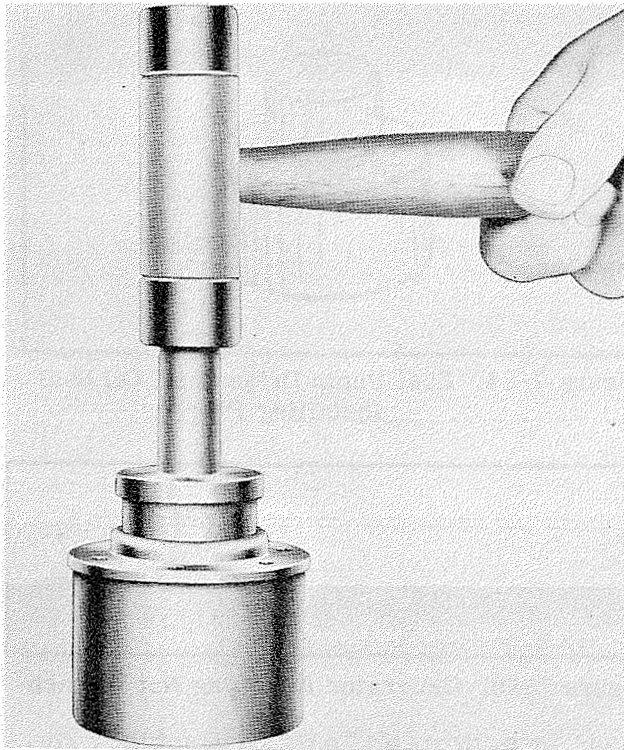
Removing Magneto Drive Gear Oil Seal from Collar
